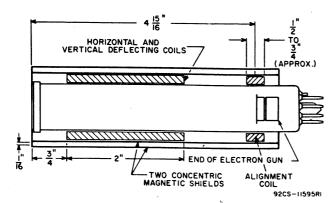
Recommended Location of Deflecting Yoke and Alignment Coil to obtain Optimum Geometry and Optimum Output Signal Uniformity.
